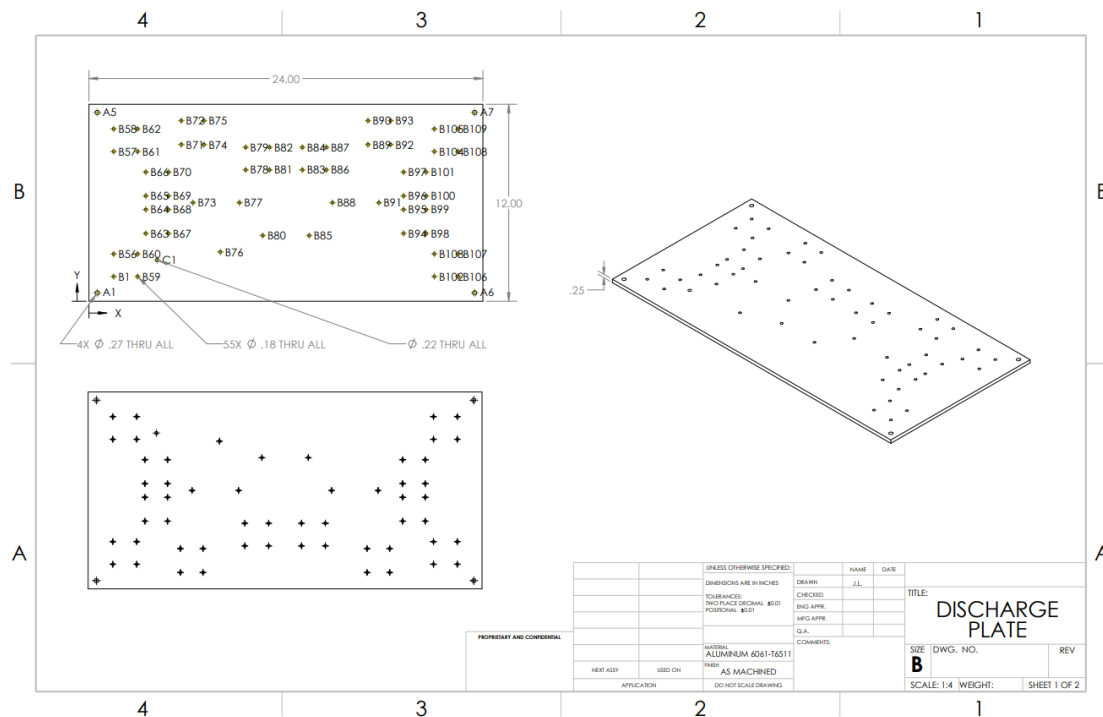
Drawing of Custom Discharge Plate (Hole Table Not Shown)
